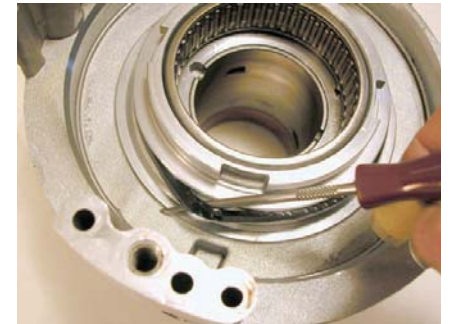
Inner piston seals can usually be removed with a small pick. Inspect the seals carefully for damage and excessive wear.
